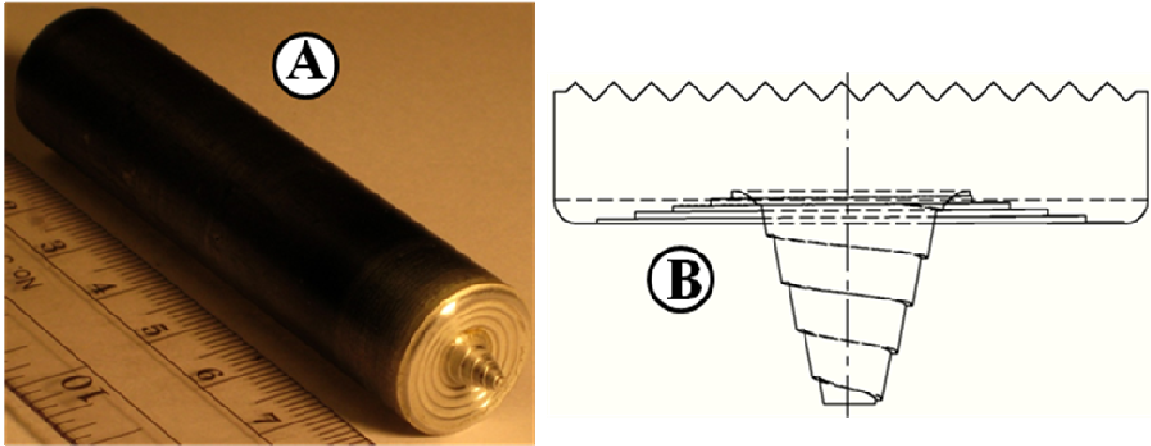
(A) Image of scrolled H13 tool. (B) Schematic of H13 tool showing scroll in shoulder and pin.
